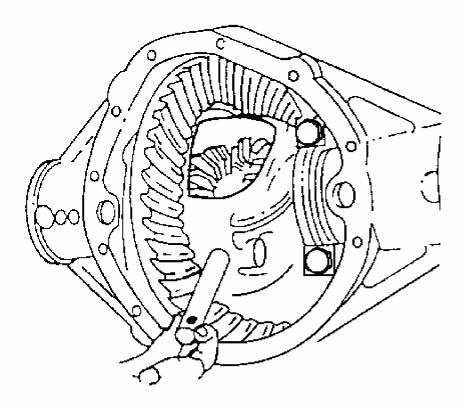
View Of Pinion Shaft Courtesy of GENERAL MOTORS CORP.
